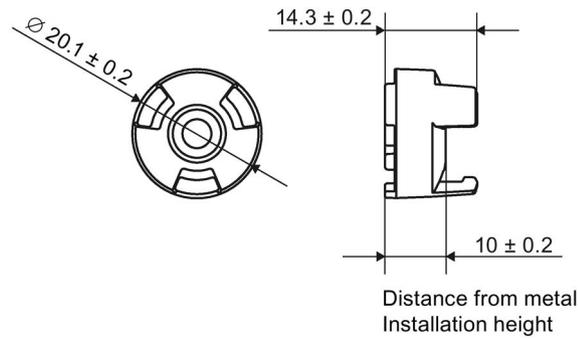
Dimension drawing of spacer 6GT2690-0AG00
